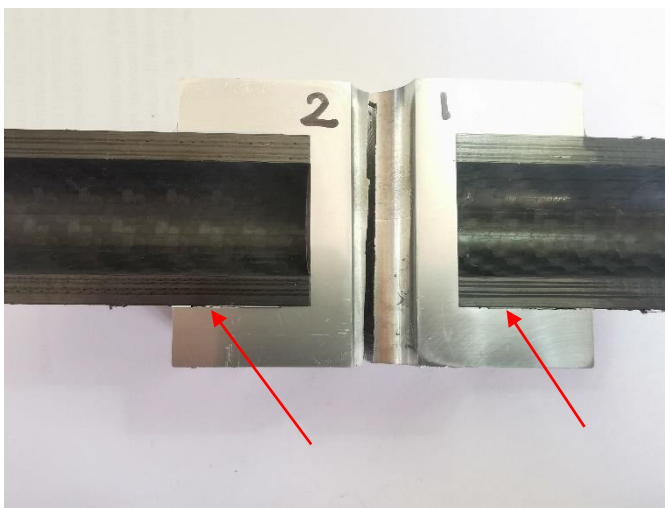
shows the sectioned aluminium joint where the load was applied. After sectioning the aluminium joint, the CFRP tubes did not adhere to the aluminium part
